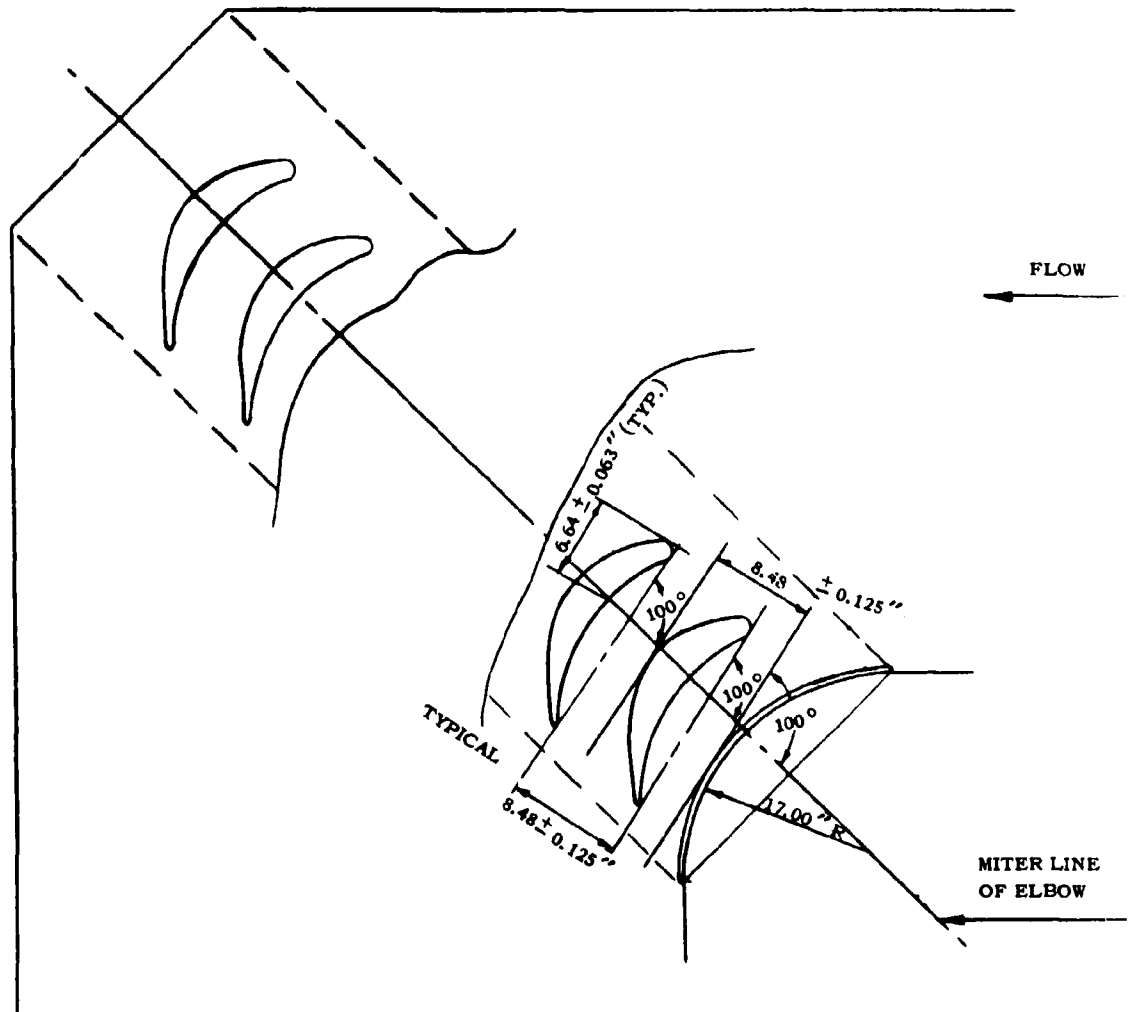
36-Inch Water Tunnel, Elbow Guide Vanes Configuration
